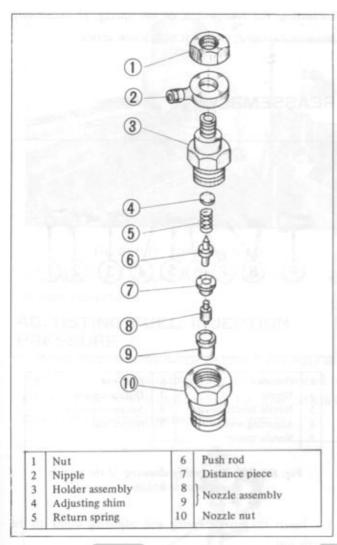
Disassembly drawing of the nozzle and nozzle holder
